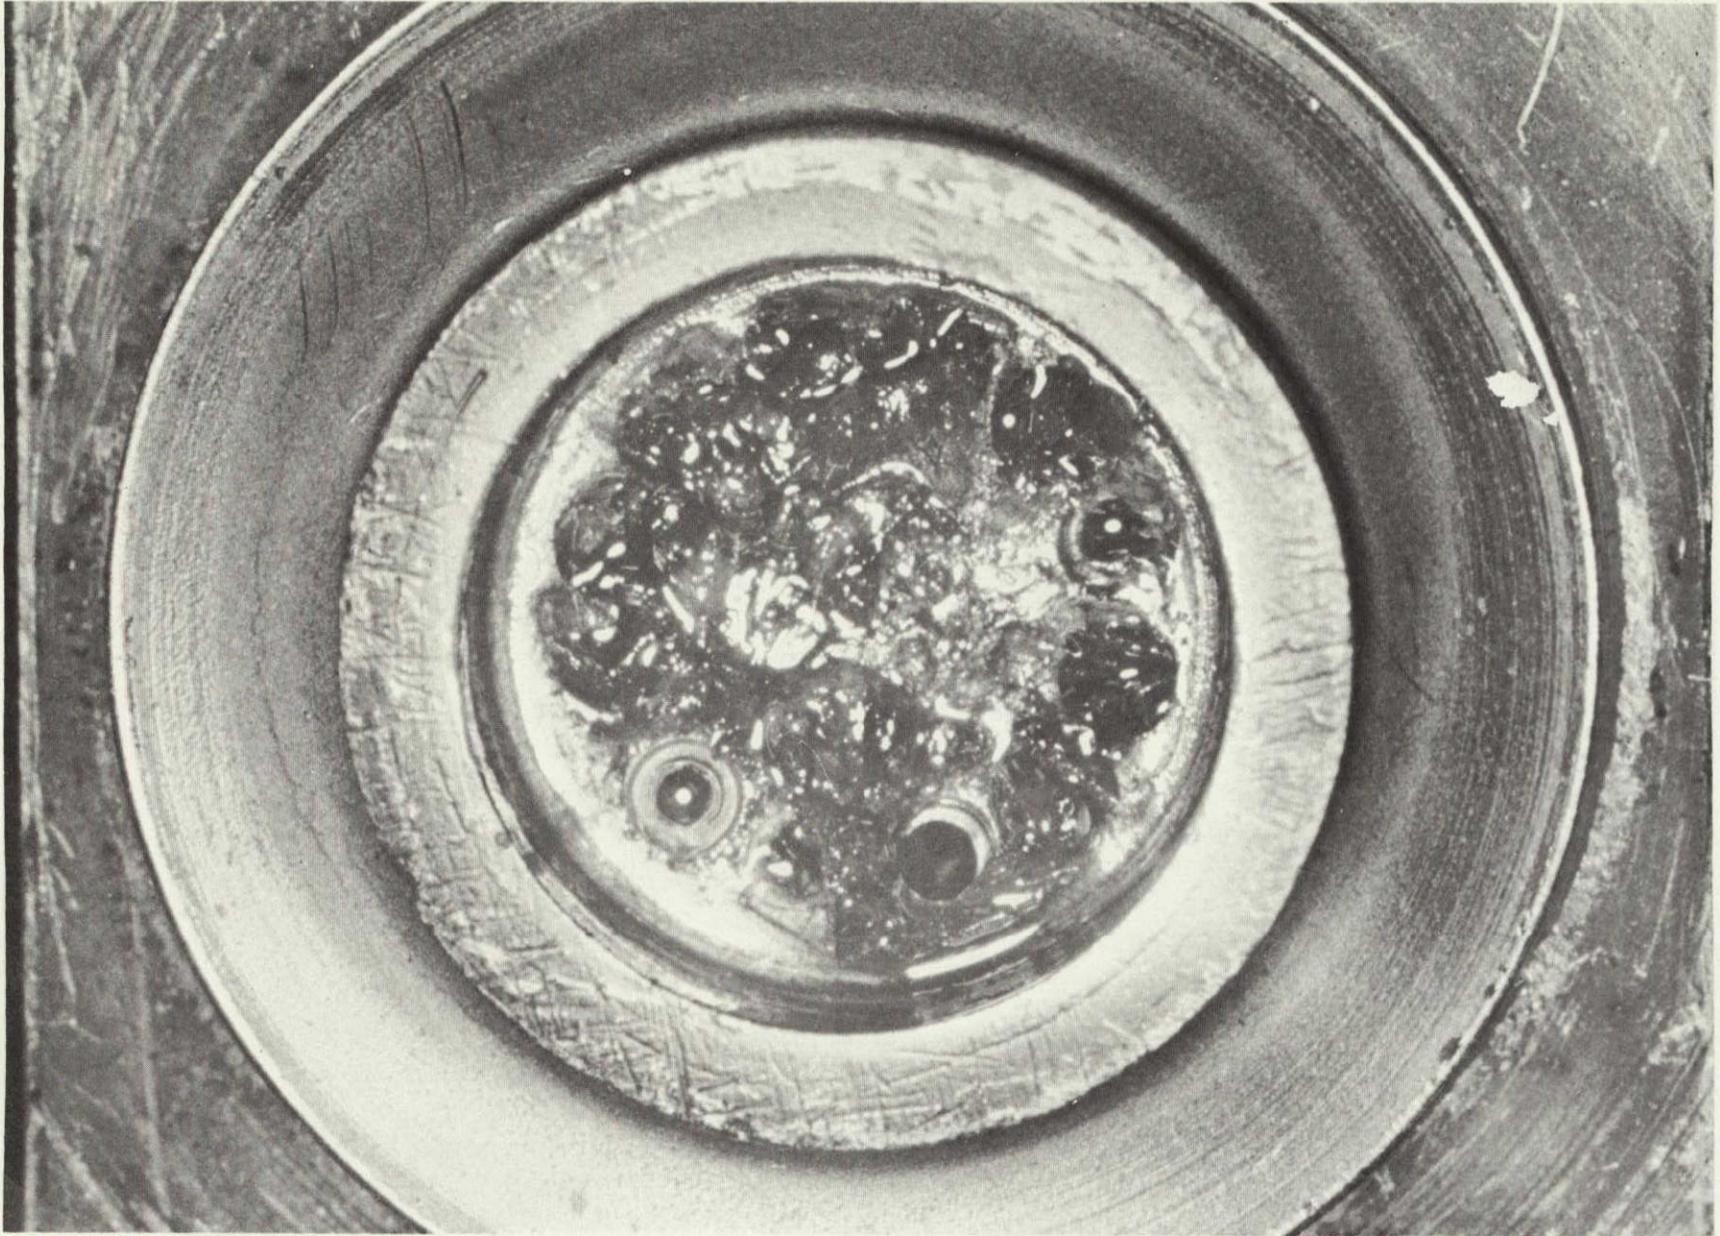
Oxidizer Injector Tube (Sheet 1 of 2)
